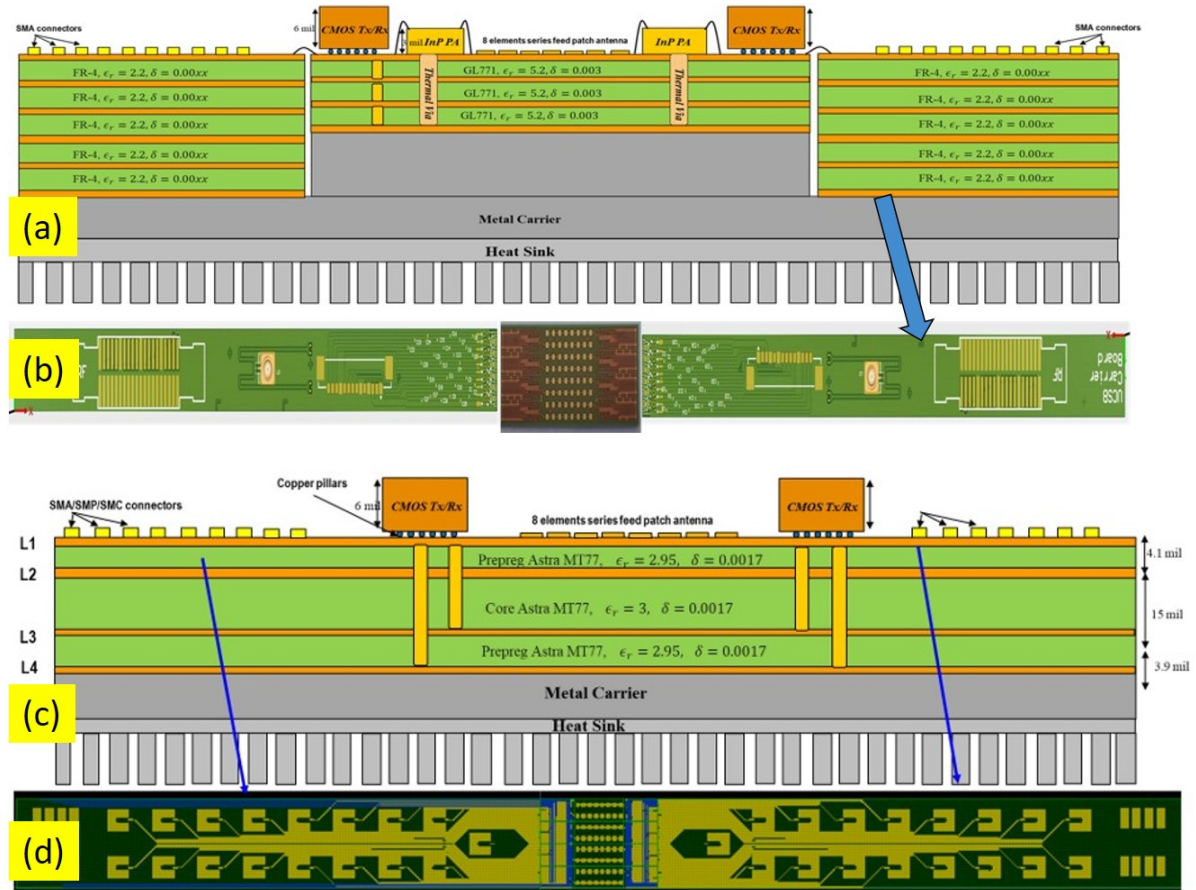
a) Cross section of the LTCC approach (this work) showing the interposer, chips, PCB carrier board with the DC and RF connectors. b) Top view of the LTCC approach. c) Cross section of the low-cost PCB approach (Courtesy of Ali Farid). d) Top view of the low-cost PCB approach.
